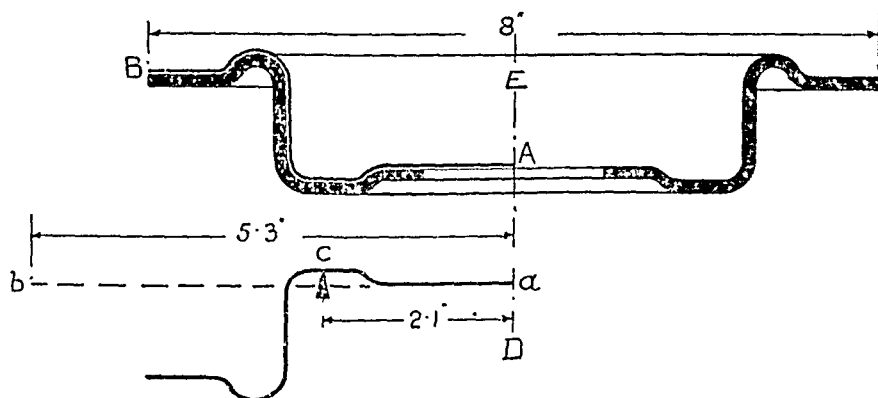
FINDING BLANK DIAMETER FOR CUP-SHAPED PRESSINGS
